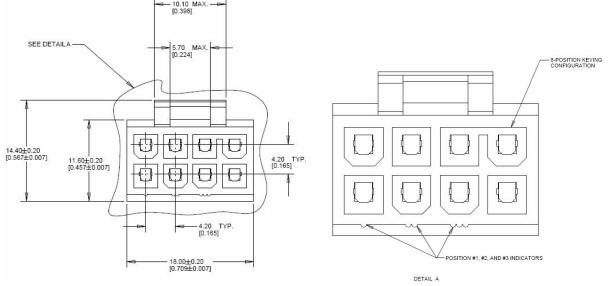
Modular Plug Connector Housing (All dimensions in mm [inches])
